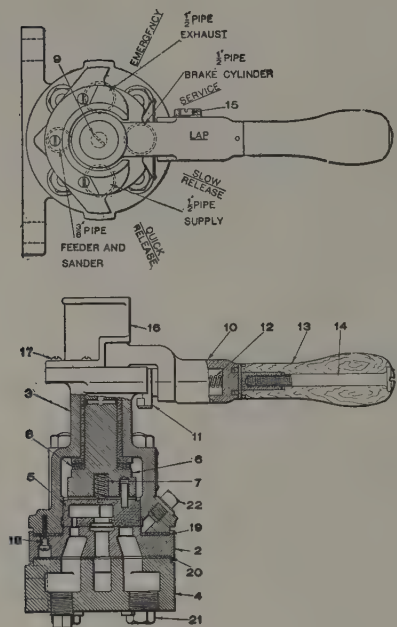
Motorman's Straight Air Brake Valve, Type SX-2.
